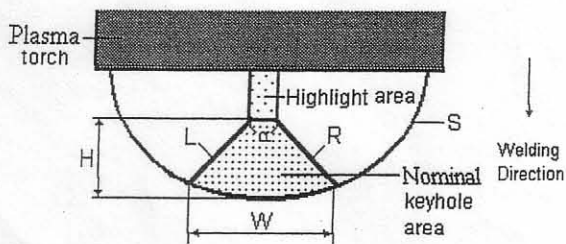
Schematic of the nominal keyhole weld pool viewed from the top face weld
